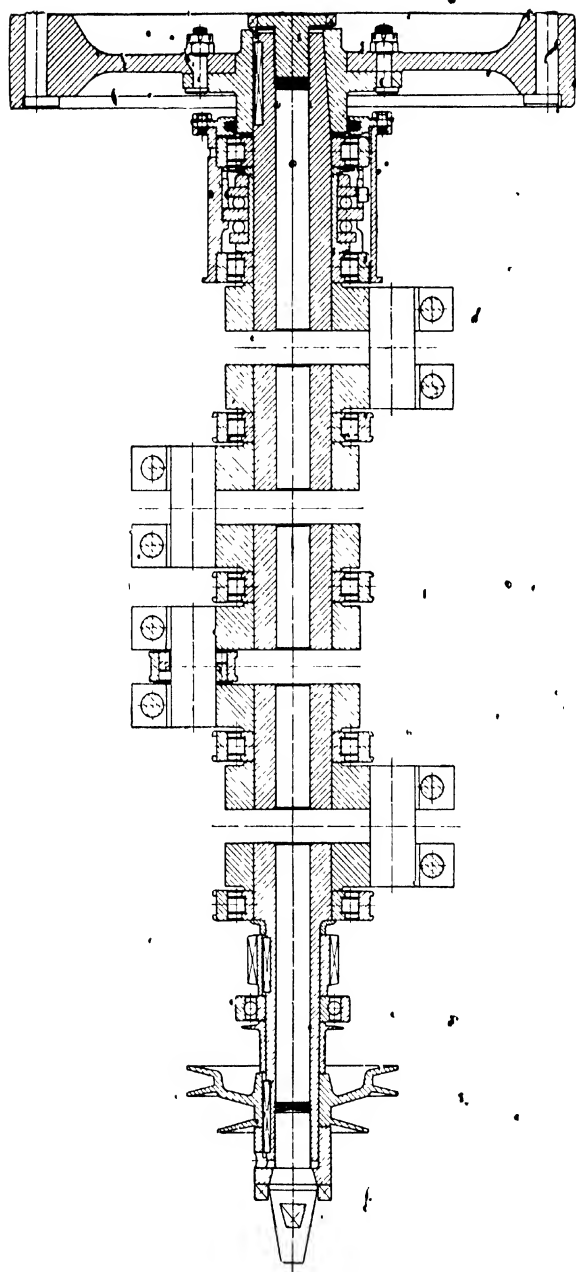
Roller-bearing built-up Crankshaft for heavy Commercial Vehicle Engine
